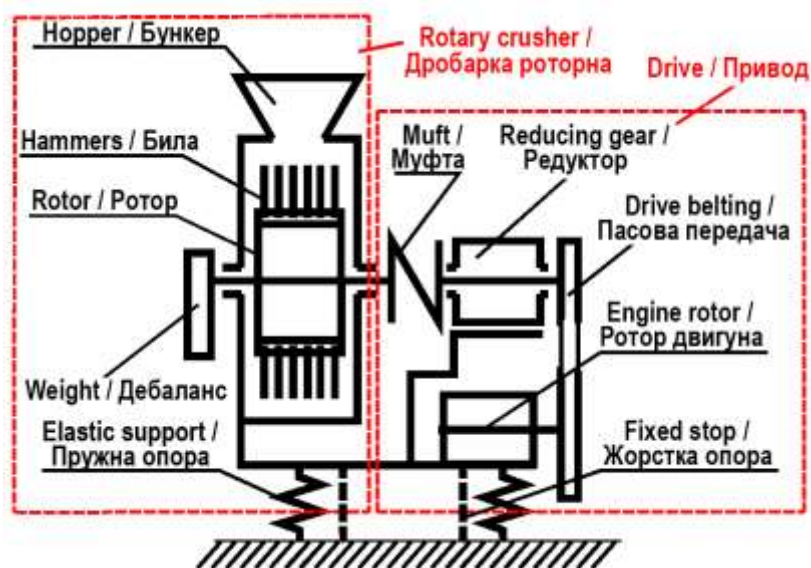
Construction scheme of rotor crushing machine on fixed stop and elastic foundation / Конструктивна схема роторної подрібнювальної машини на жорсткій і пружній основах
